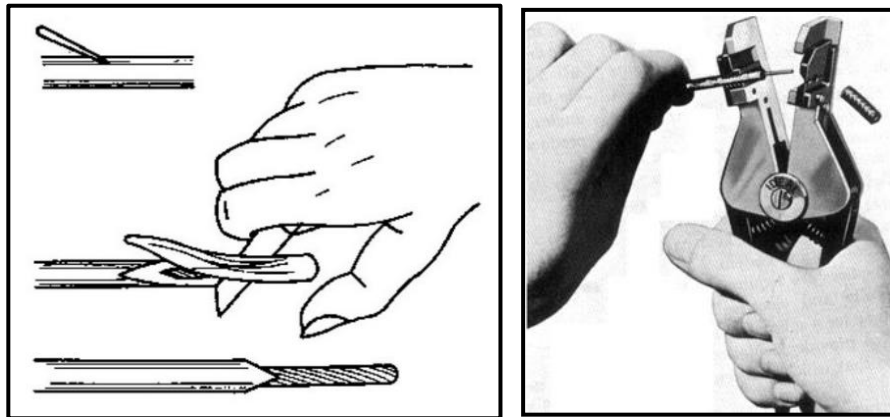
Removing the cable insulation with electrician knife and wire stripper
